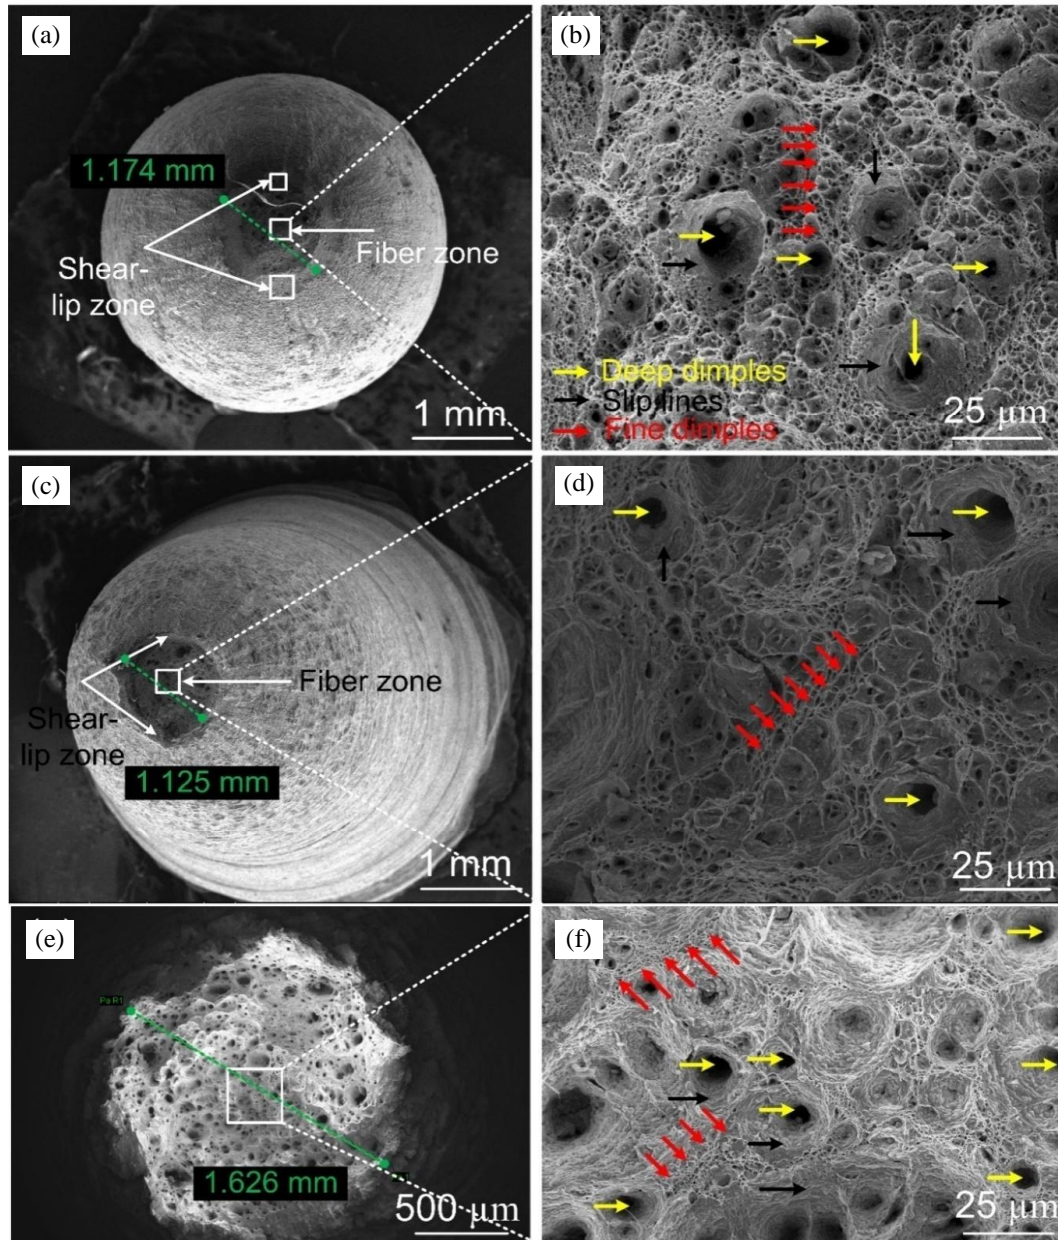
SEM fracture surface images of ruptured specimen at 620 °C under 200 MPa; for as-welded condition (a) macro view (b) magnified view of the fiber zone showing equiaxed dimples; for PWHT condition (c) macro view (d) magnified view of the fiber zone showing equiaxed dimples; for PWNT condition (e) macro view (f) magnified view of the fiber zone showing equiaxed dimples
